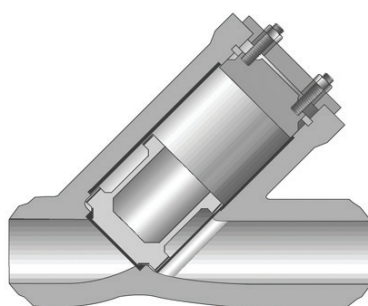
BY "Y" Pattern Stop-check, Butt Weld Ends
